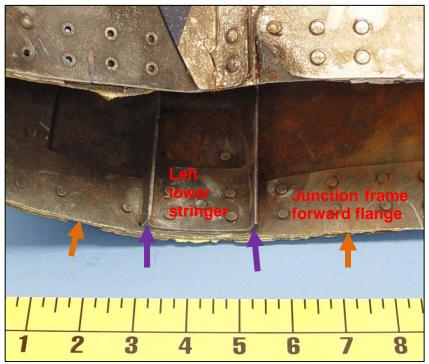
The left lower stringer and the fractured forward flange of the junction frame.
